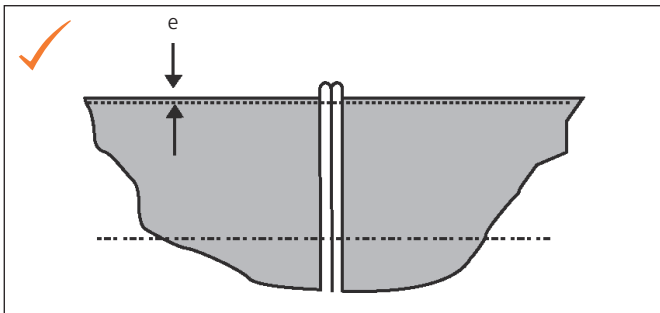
Butt-weld with even welding beads (acceptable)
